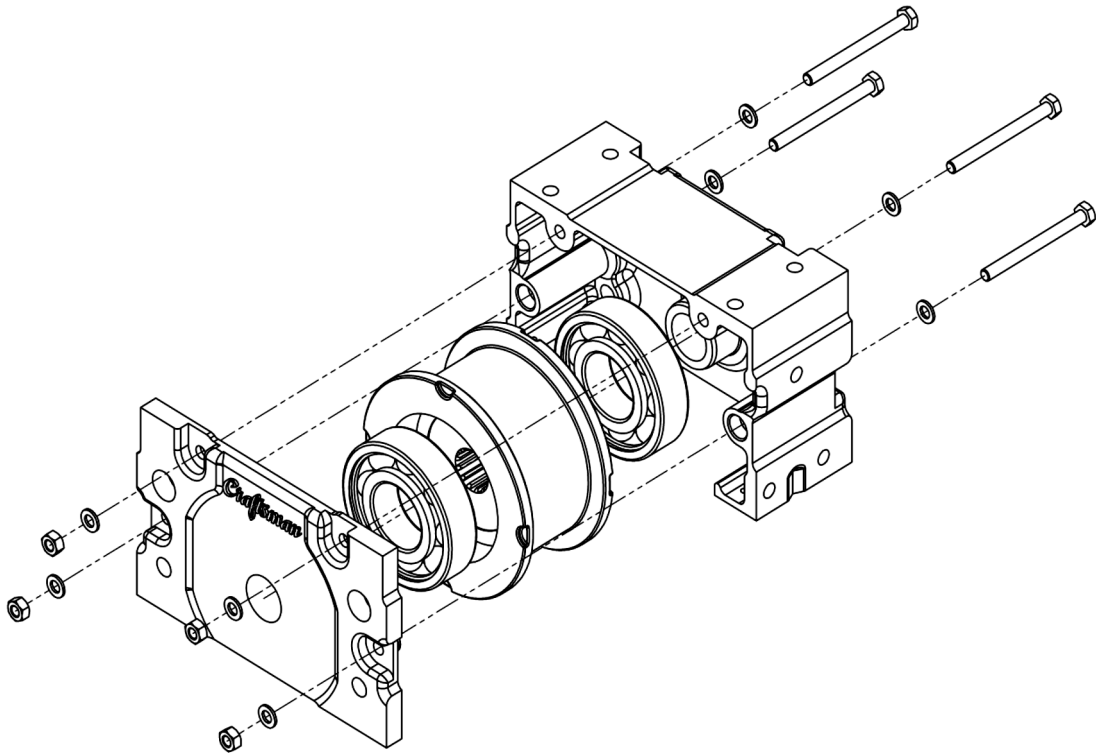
Exploded view of Wheel block system CRWB 112 TO 200
